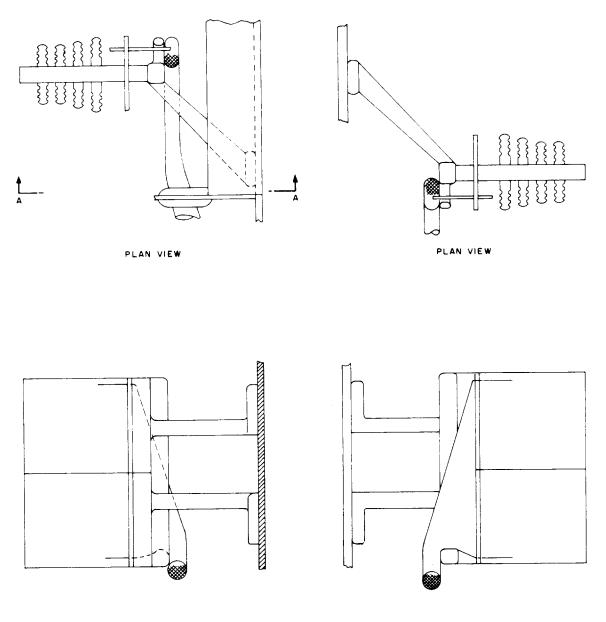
Terminal Strips—227 and Similar Types—Local Cable Form on Equipment Unit
